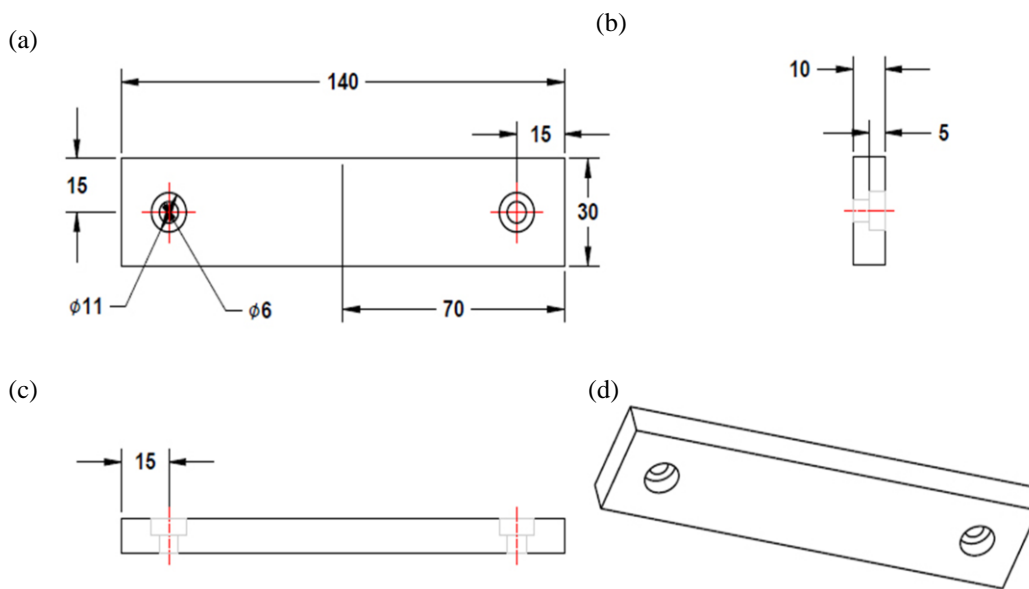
(a) Projected front view, (b) projected side view, (c) projected top view, and (d) three-dimensional CAD model of the end plate of the height adjustment system (all dimensions in mm).
